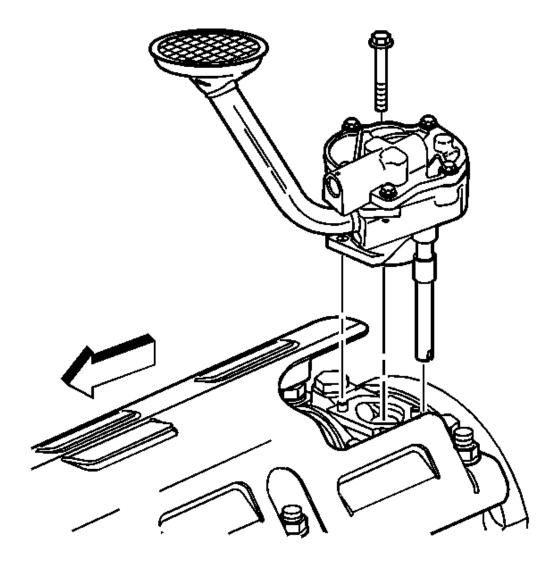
View Of Oil Pump Courtesy of GENERAL MOTORS CORP.
